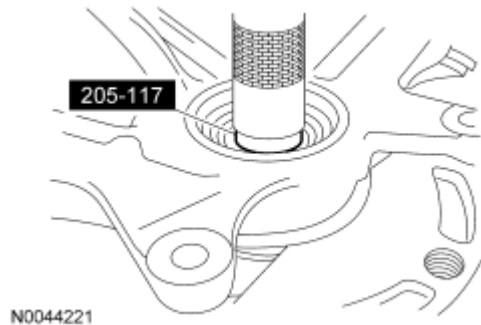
Pressing Wheel Hub From Wheel Bearing Using Special Tool (205-117)
